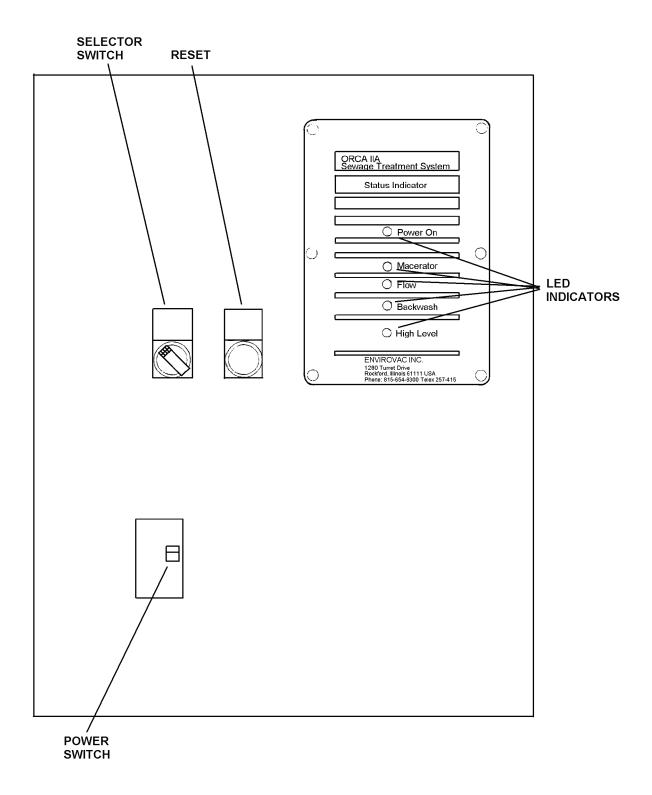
Marine Sanitation Device Control Panel Assembly.
